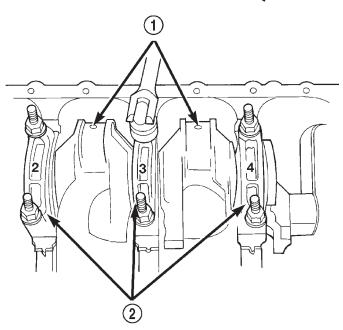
Removing Main Bearing Caps and Lower Inserts
